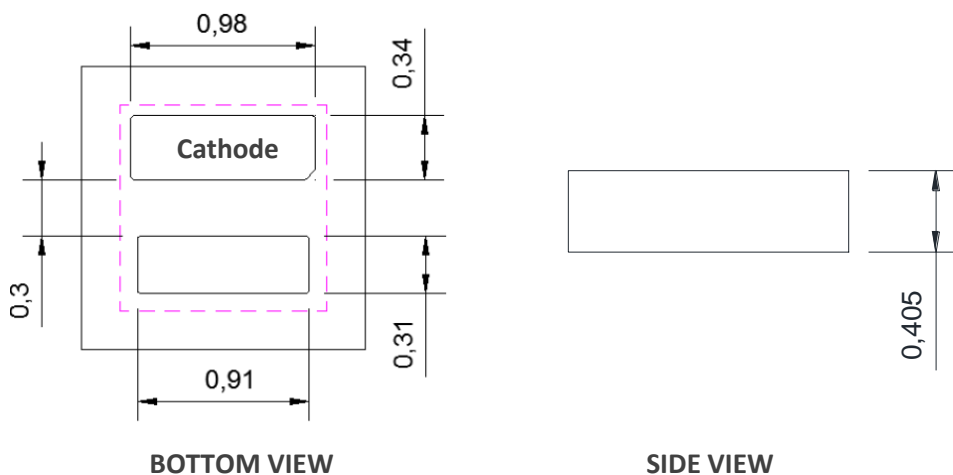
WICOP Z8Y15 Solder Pad Dimensions.
